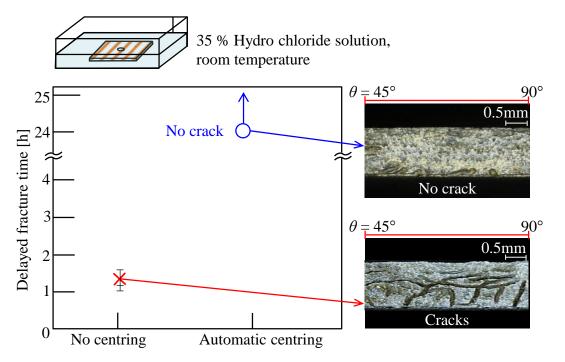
Delayed fracture times around sheared edge for punching without centring and with automatic centring.
